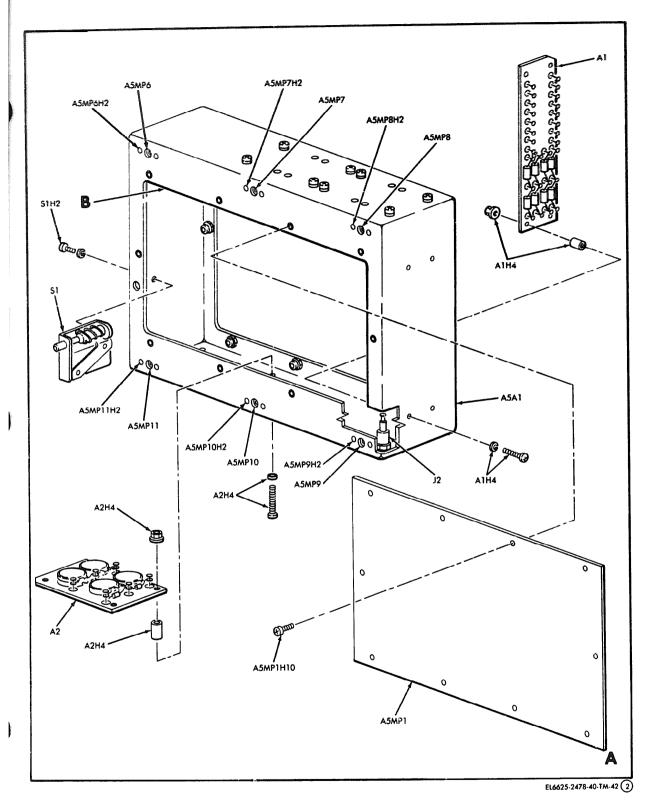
(2). Power supply assembly 1A8A9, location of parts (sheet 2 of 3).
